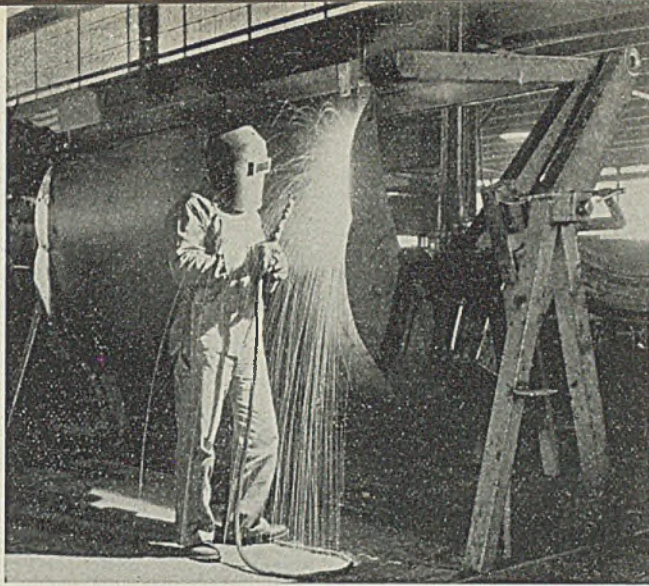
The two hinge-wing structures of this large scraper apron were built on separate fixtures and then placed in the main apron setup and weld fixture. Pan parts are then built up progressively to complete entire unit in this main fixture
